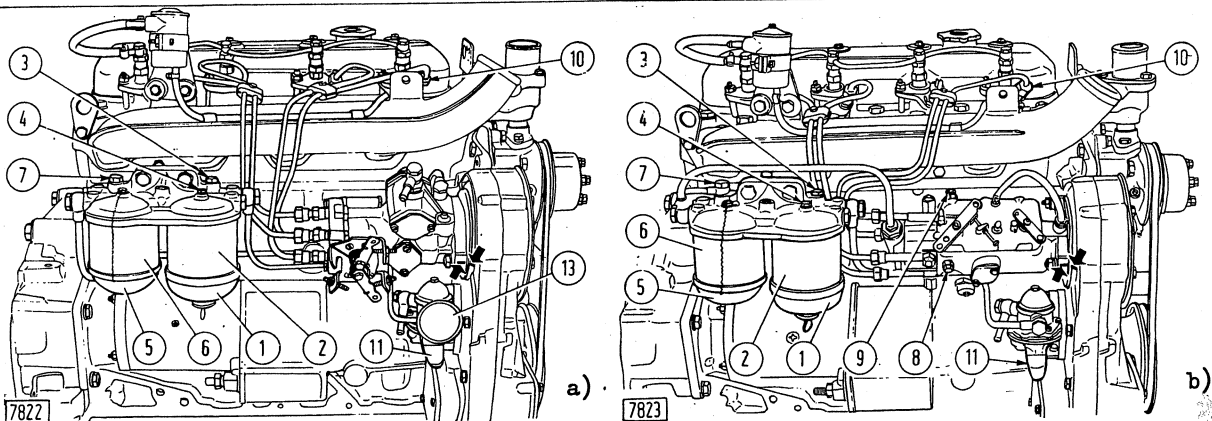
Bleeding the fuel system of engines fitted with Bosch (a) and CAV (b) injection pumps.
